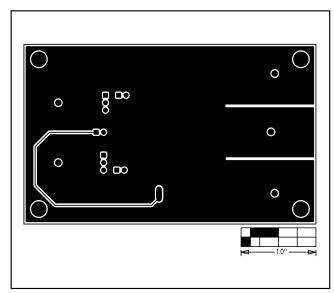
MAX7443 EV Kit PCB Layout—Solder Side
